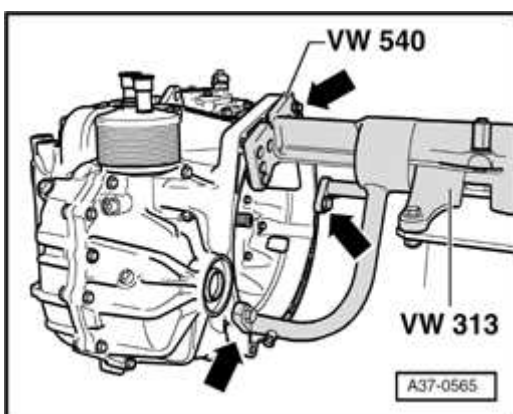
Secure Transmission To Holding Fixture VW 540 And VW 313
